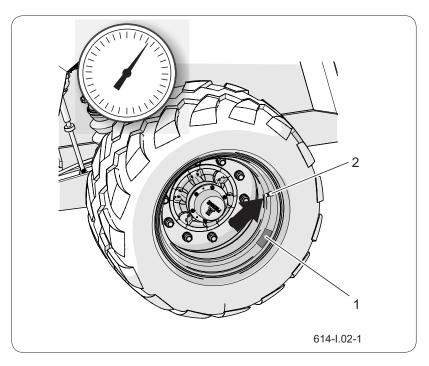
Trailer's wheel (1) sticker (2) valve
